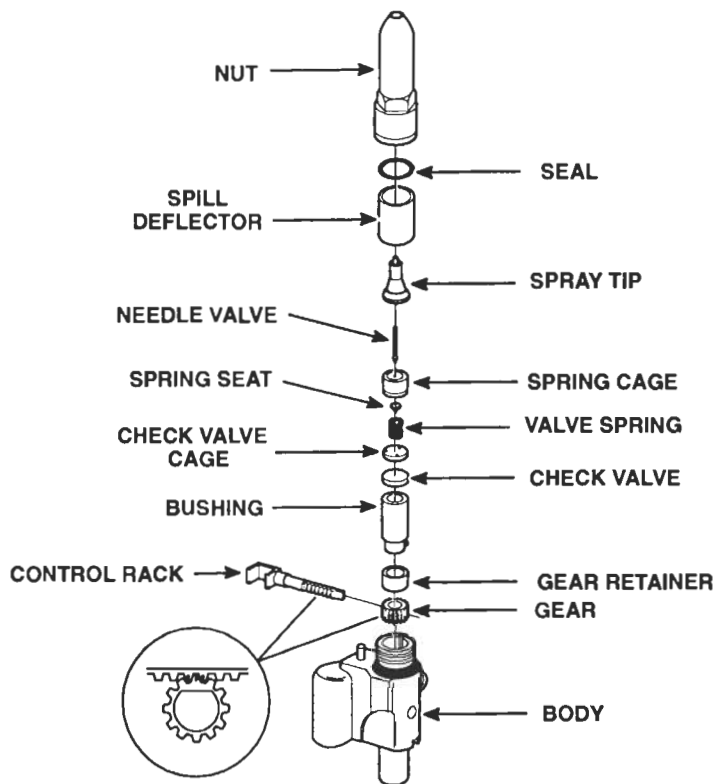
Injector Rack, Gear, Spray Tip and Valve Assembly
